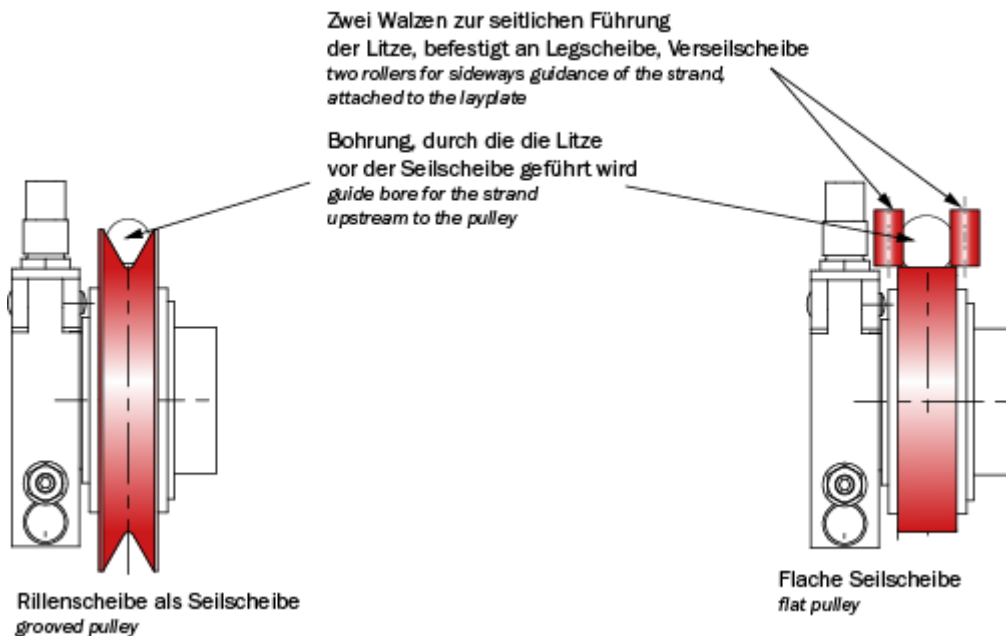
Pulley as Grooved Pulley and Flat Pulley Design
